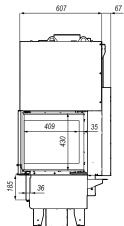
Projections with dimensions of DEFRO HOME RIVA LA G fireplace insert.
